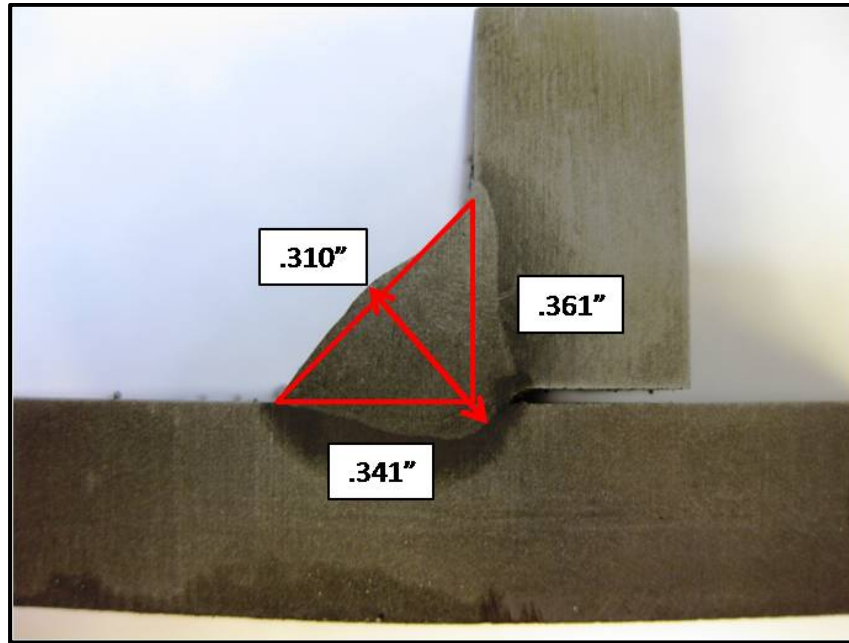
Cross-section of 96 pound weld at  $L = 1$
